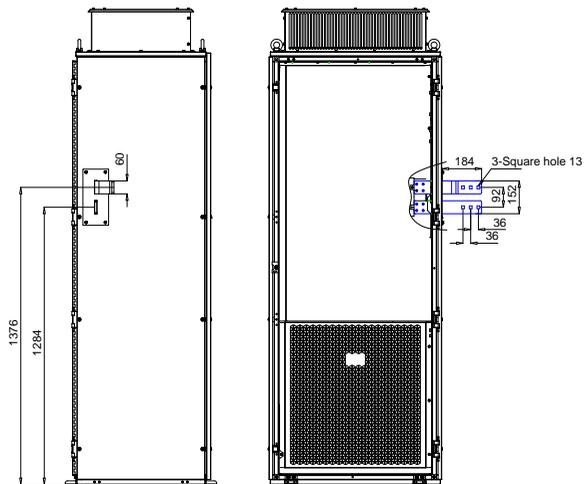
Mounting dimensions of adapter busbar (unit: mm)
